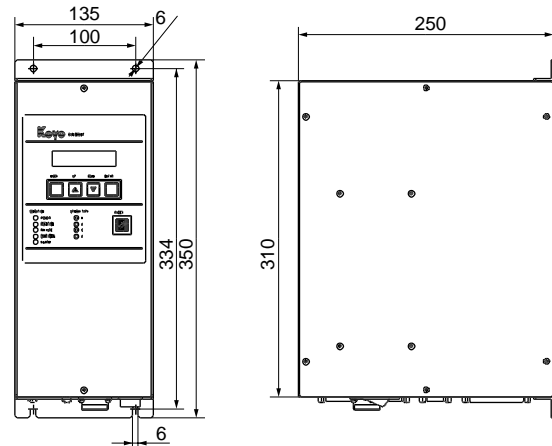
General-purpose controller MDCA3A for Koyo active magnetic bearing
